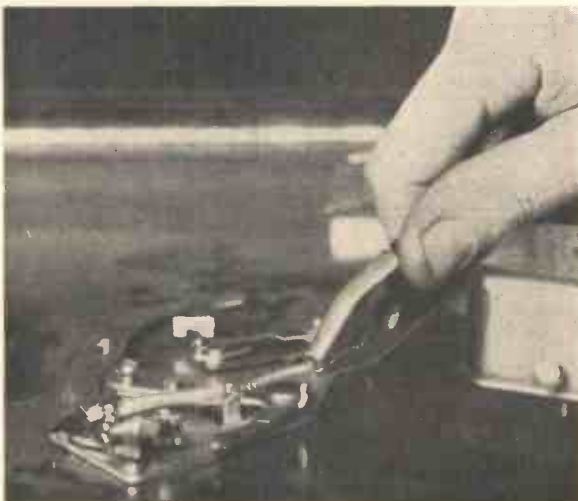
ADJUSTING THE BRAKE SWITCH RATCHET PLATE SPRING.
